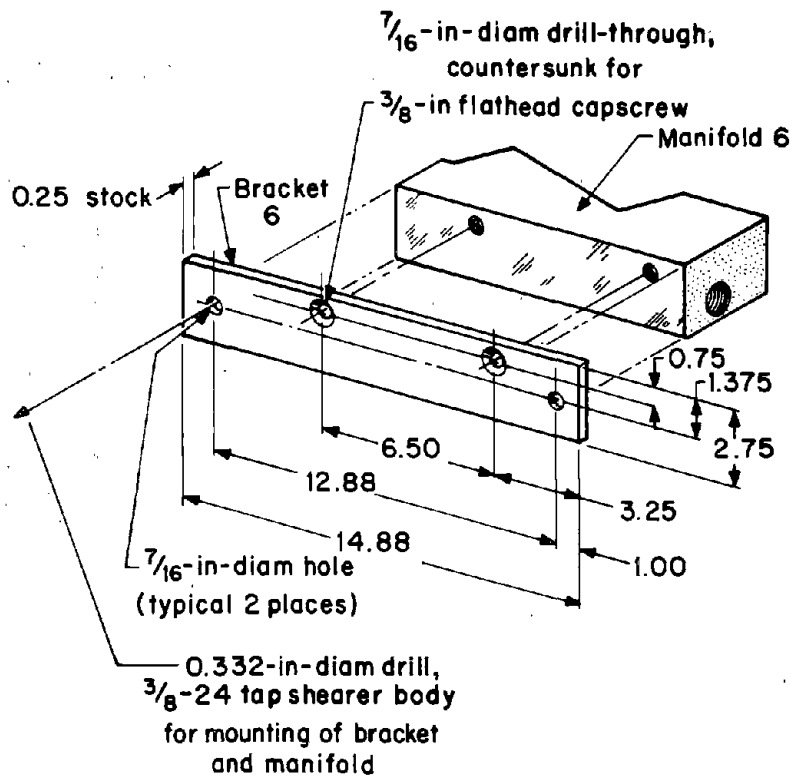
Mounting bracket for water spray manifold 6. All dimensions are in inches.
